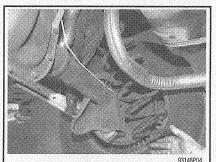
Remove the spring from its seat on the rear axle. Save and reuse any coil spring covers or noise insulators
